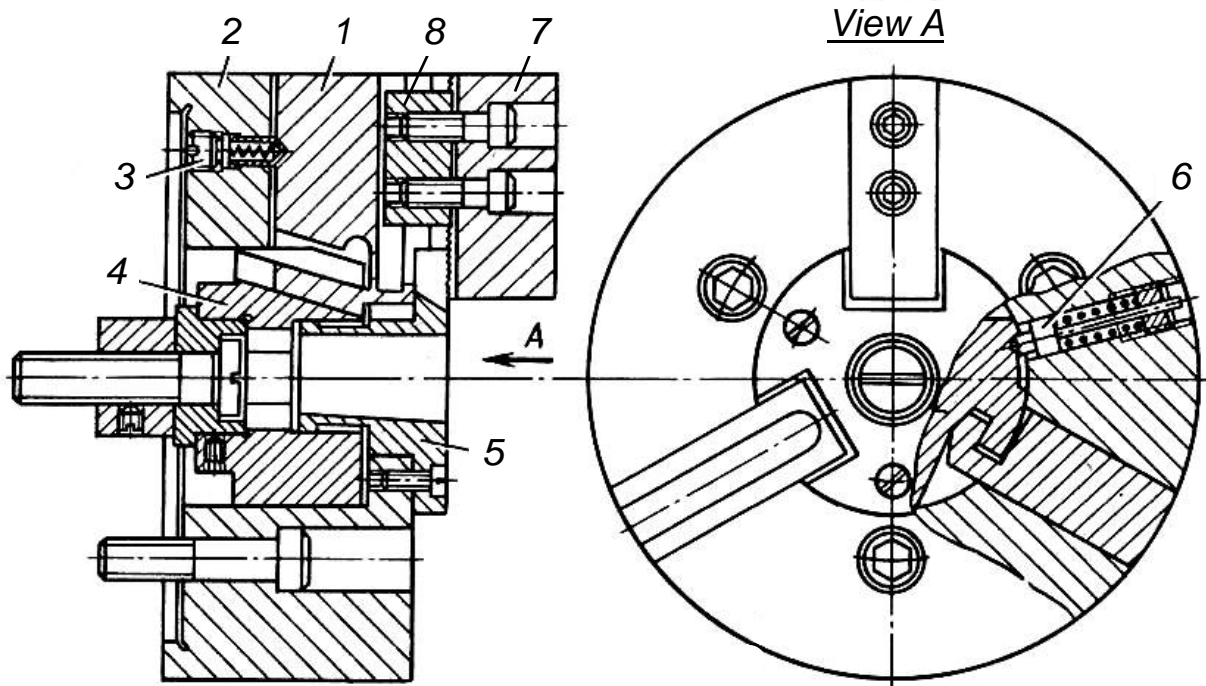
Self-centring three-jaw chuck with wedge drive mechanism
